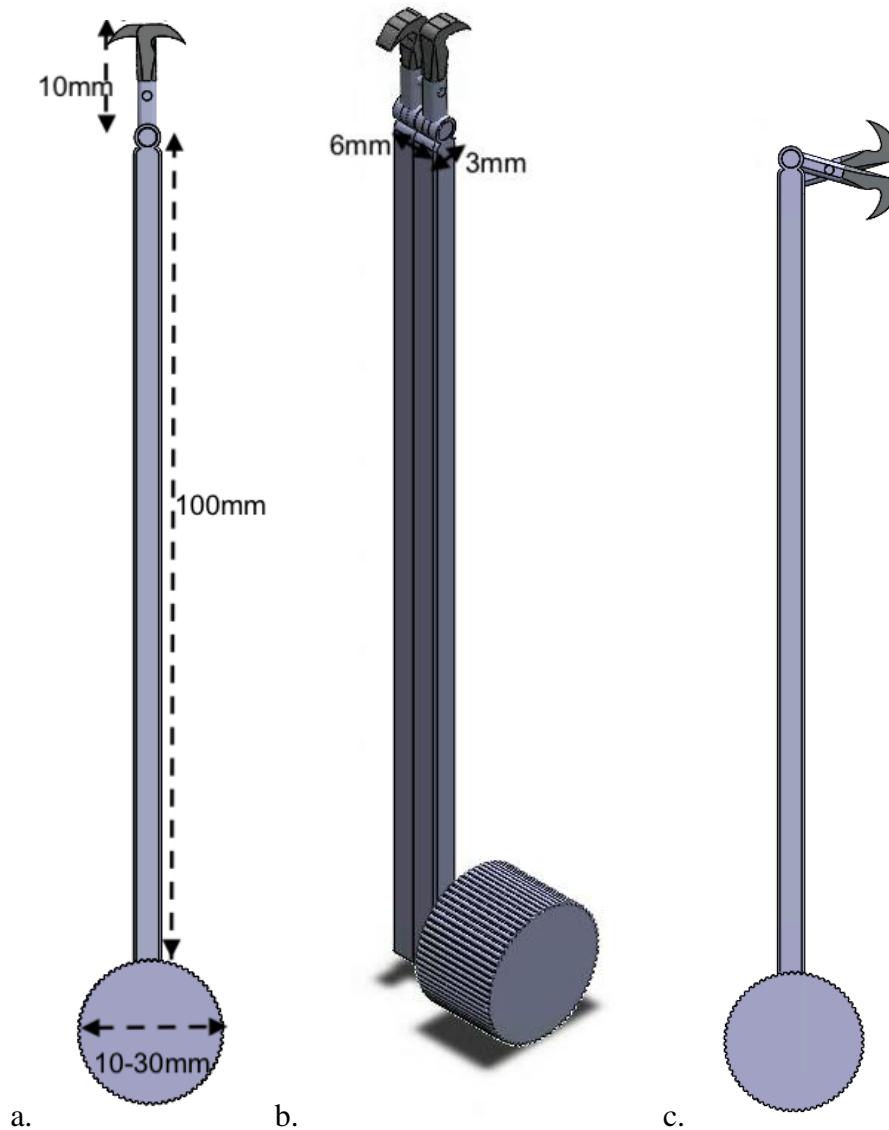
Views of a CAD model of the designed tool, alongside the appropriate dimensions of the tool. (a) front view, “closed”; (b) isometric view, “closed”; (c) front view “open”.
